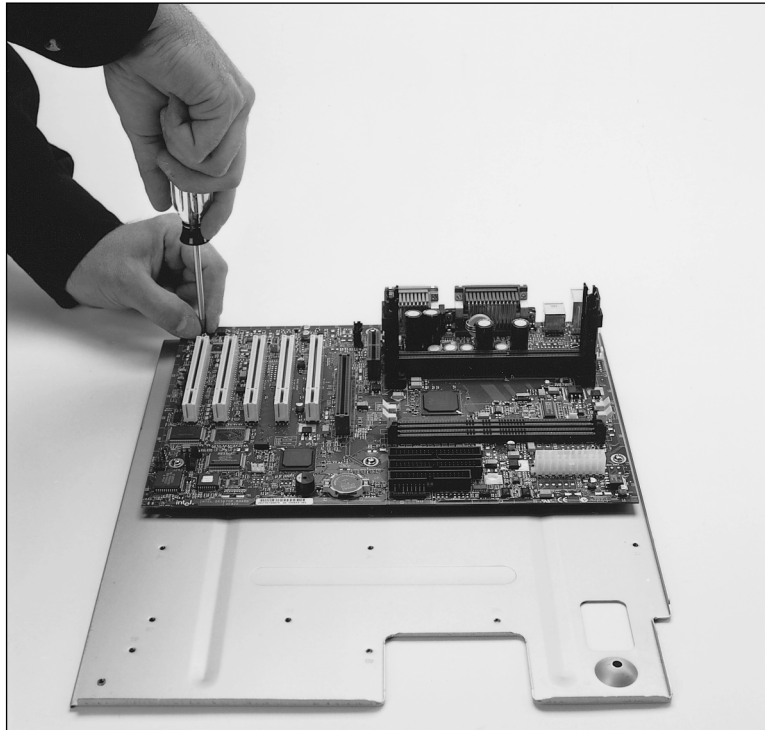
Attaching the motherboard to the motherboard tray. *Motherboard courtesy of Intel Corporation.
